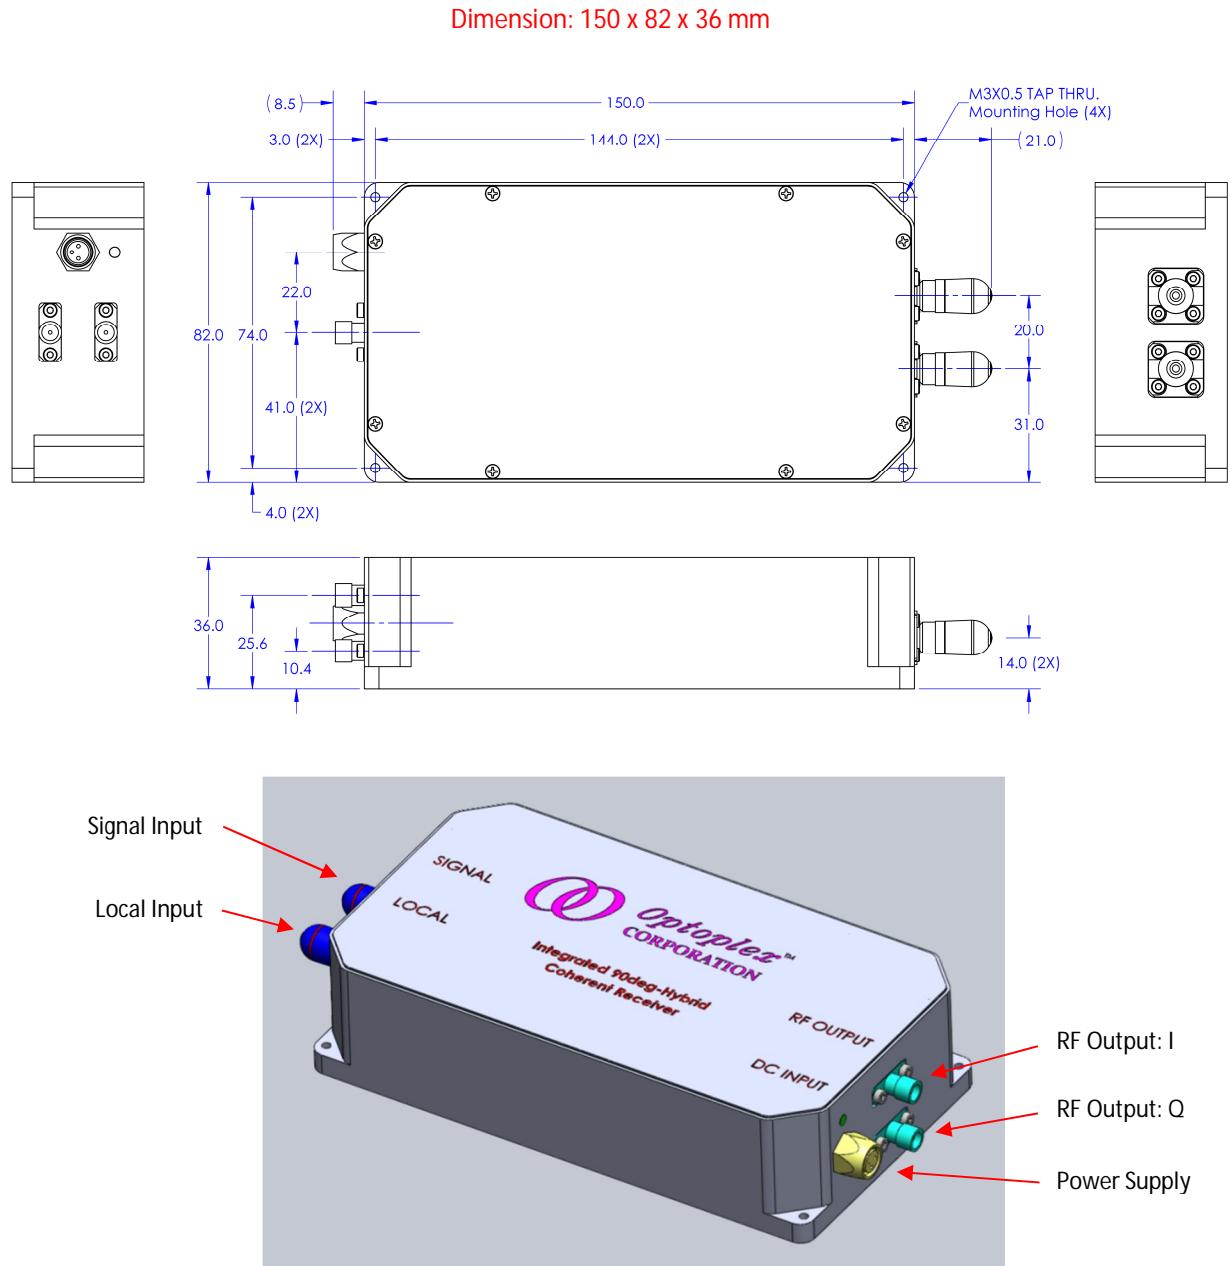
, Mechanical drawing of the integrated 90deg hybrid with balanced receiver
